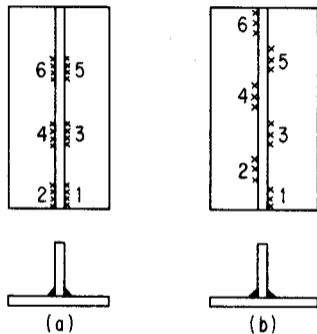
Use of intermittent welds to balance shrinkage force.
